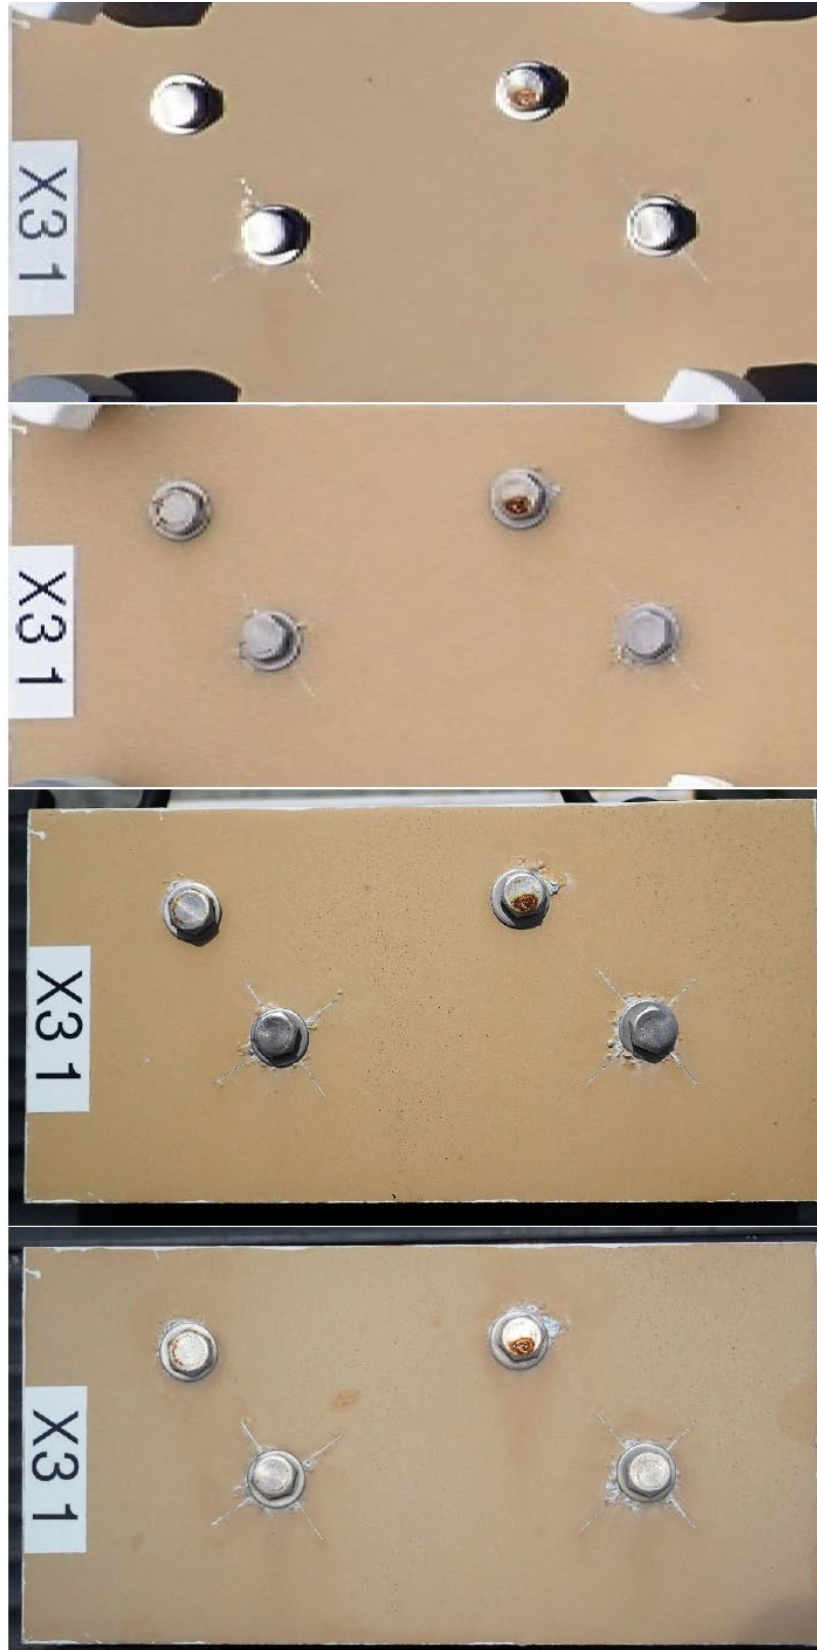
Panel X3-1 top-bottom: 3-, 6-, 9-, and 12-month inspection images
